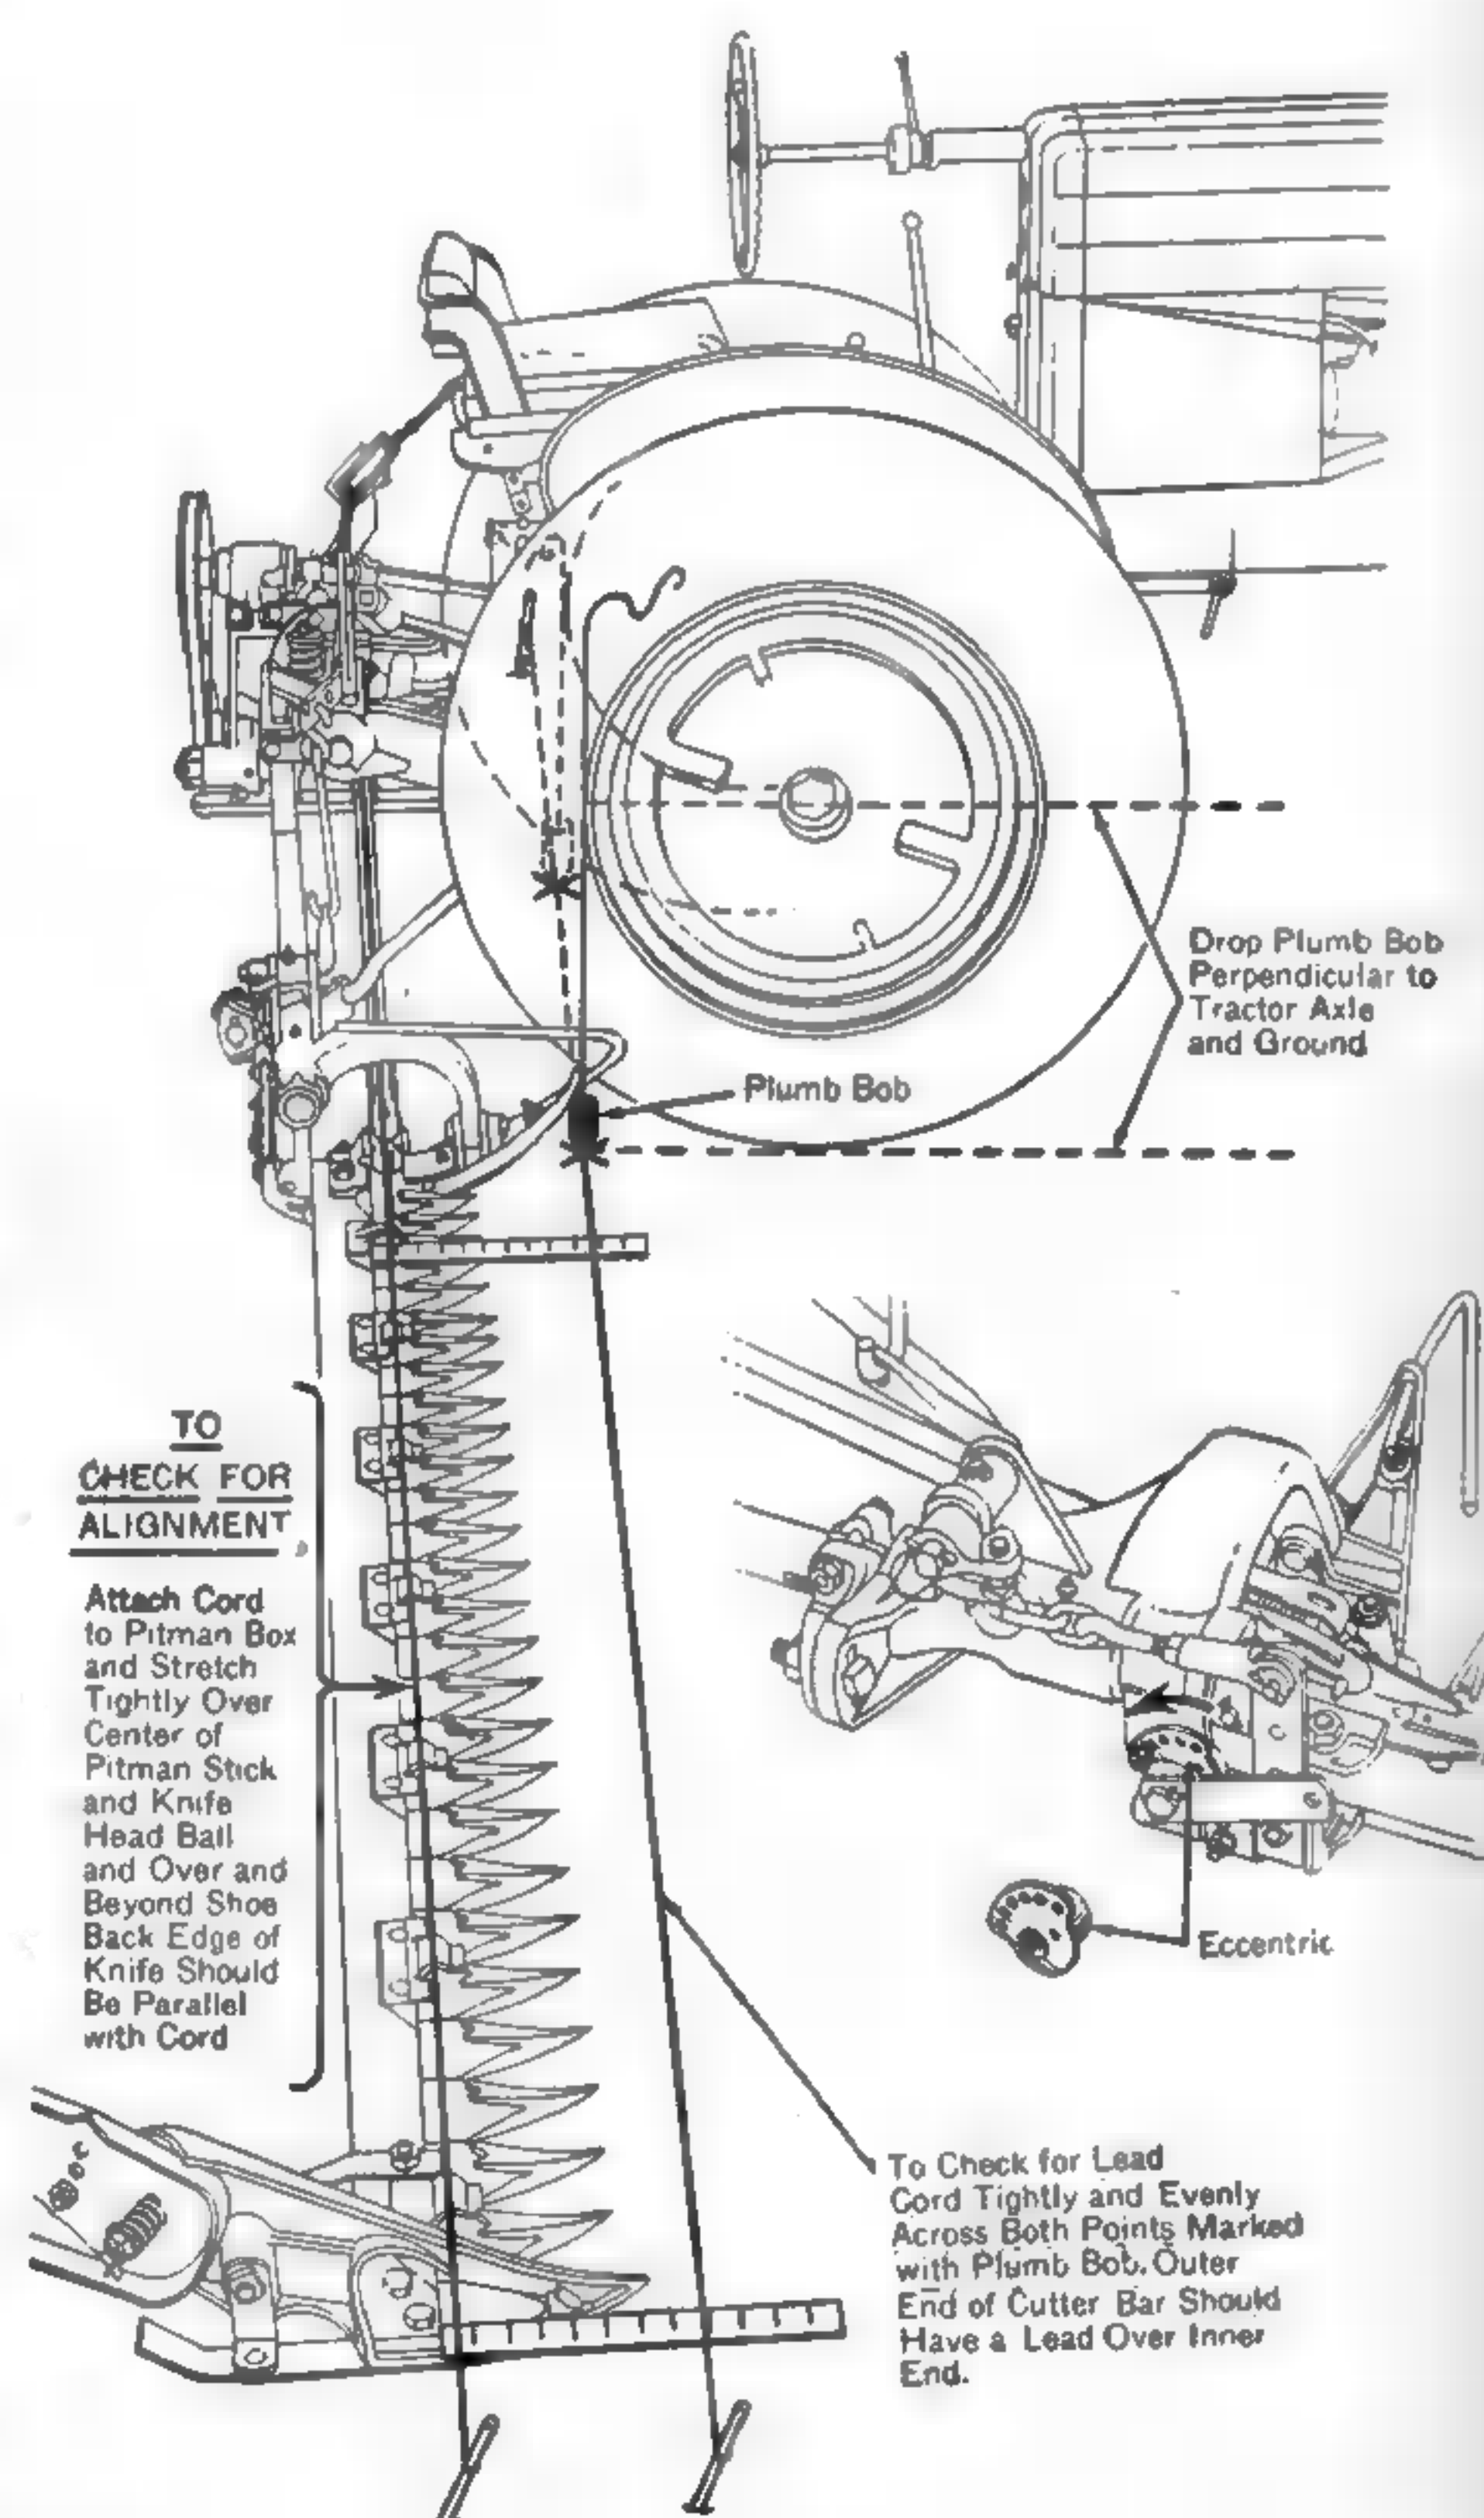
Overhead view of a mower, showing how to determine lag or lead in the cutter bar.
